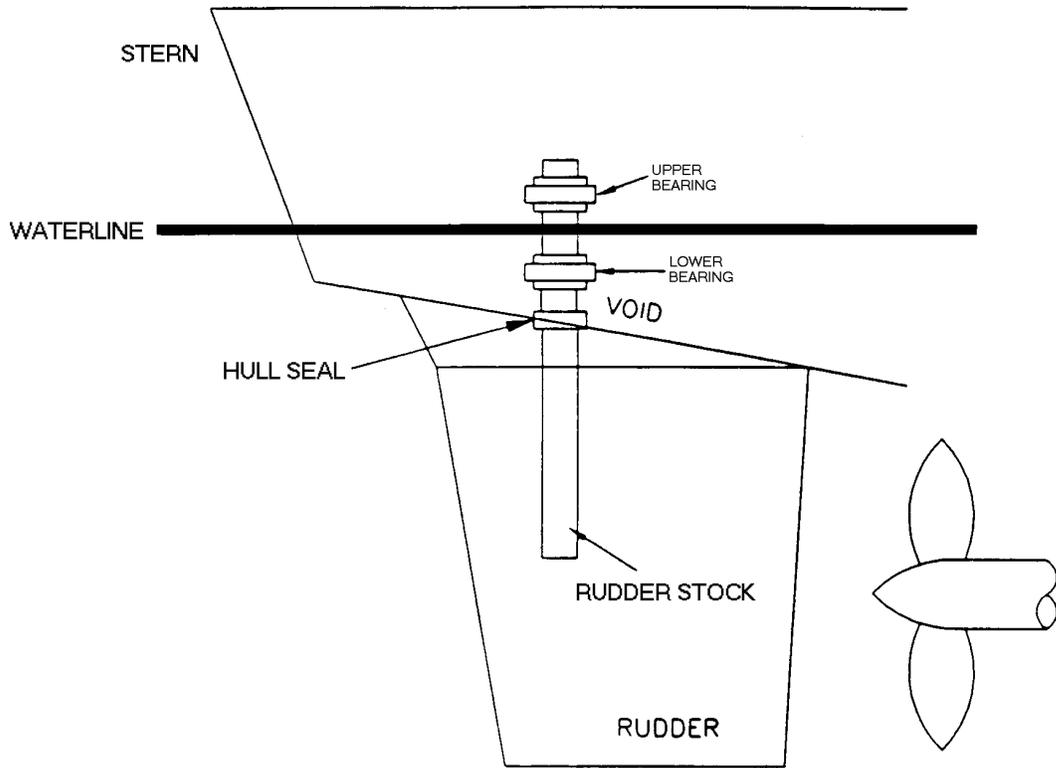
Rudder Grease-Lubricated Roller Bearings Generic Sketch
